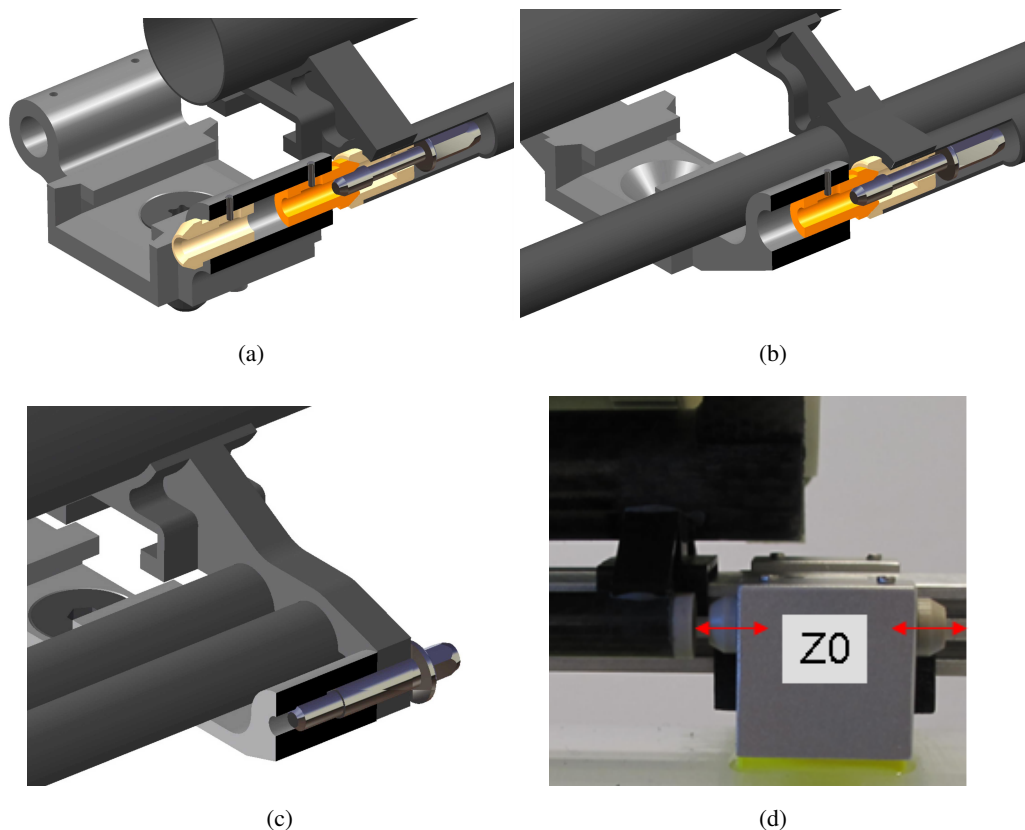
Perspective CAD drawings of the stress-less sliding locking points for attachment of the LS to the GS at (a) $z = 0$ (a) and (b) $z = 600$ mm. A perspective of the the fixed locking point at $z = 1200$ mm is shown in (c). A prototype of the sliding attachment point at $z = 0$ is shown in (d).
